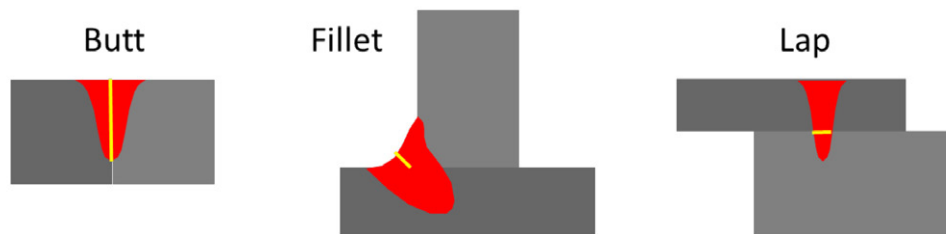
Three basic joint configurations in laser welding. The red area indicates laser melt pool and the yellow bar indicates the relation of weld strength.
